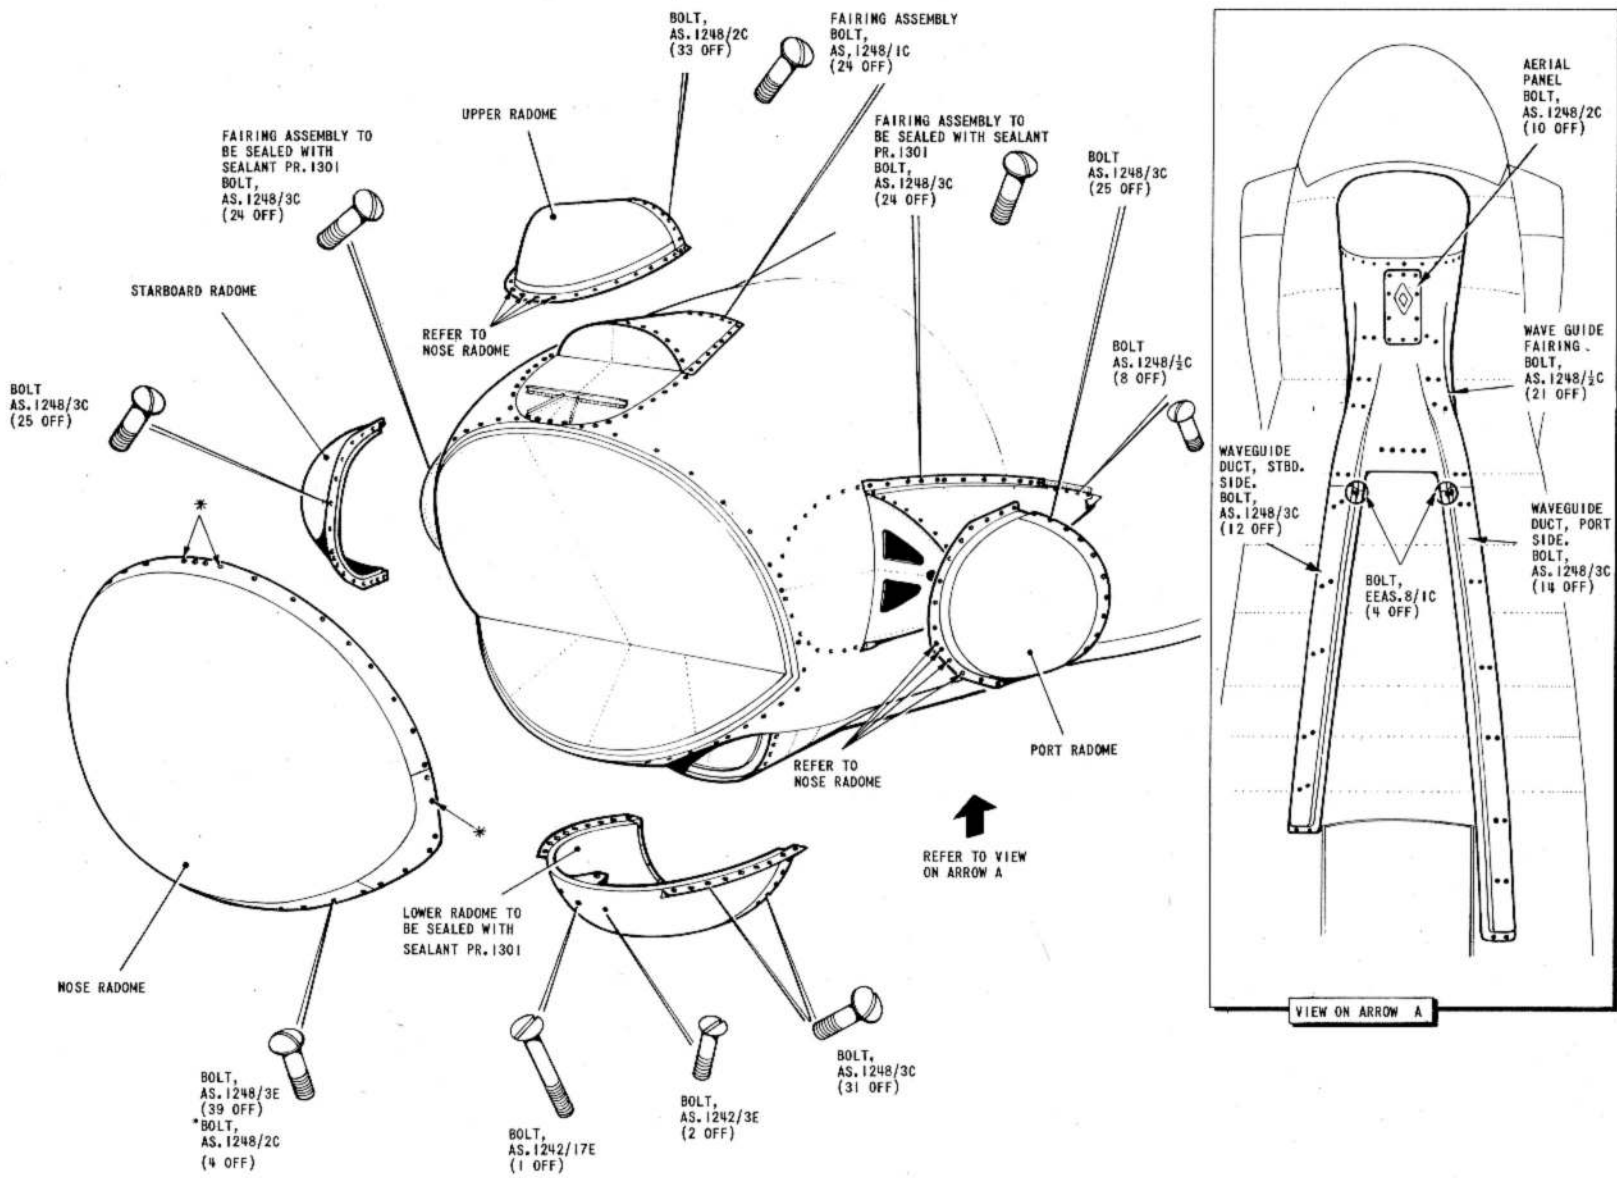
FRONT FUSELAGE - DETACHABLE RADOMES, PANELS, FAIRINGS AND DUCTS
